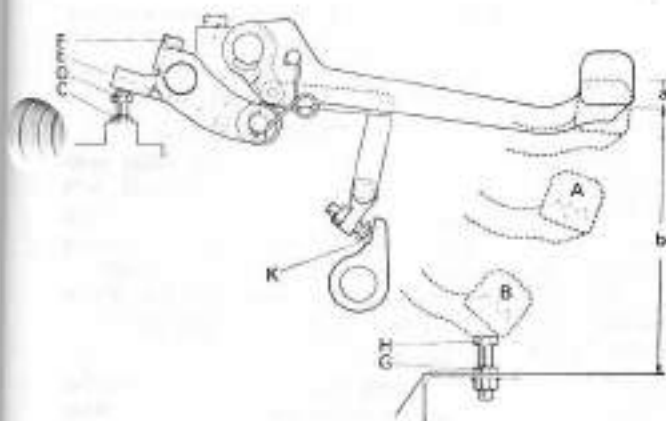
View showing adjustment points for clutch and clutch stop linkage on models 780 and 3800. Refer to paragraph 131 for adjustment procedure.
